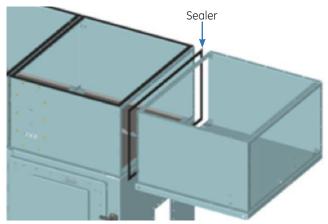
Assemble the extension plenum using 3/8" Hardware.
